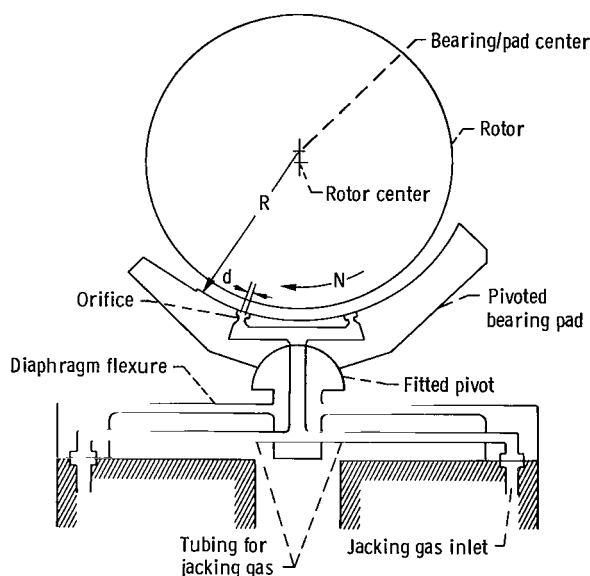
Flexure mounted journal bearing pad and jacking gas system.
